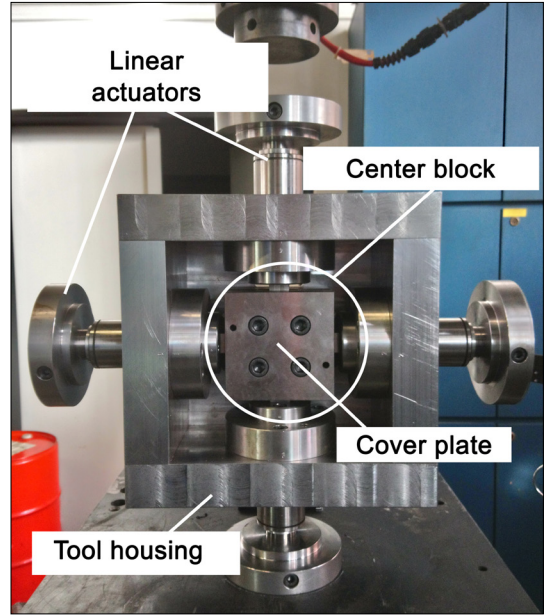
General construction and main parts of the used closed-die multi-axial forging tool
